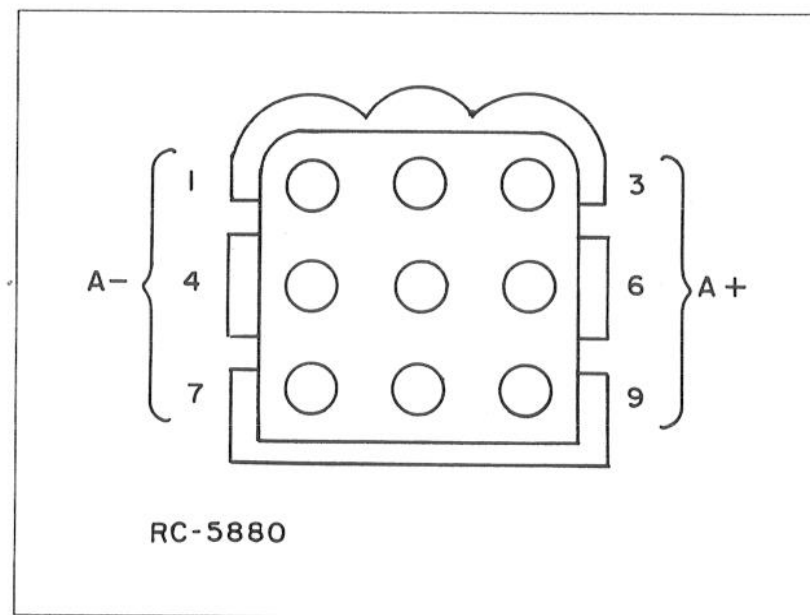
REAR VIEW OF EMPTY CONNECTOR HOUSING
